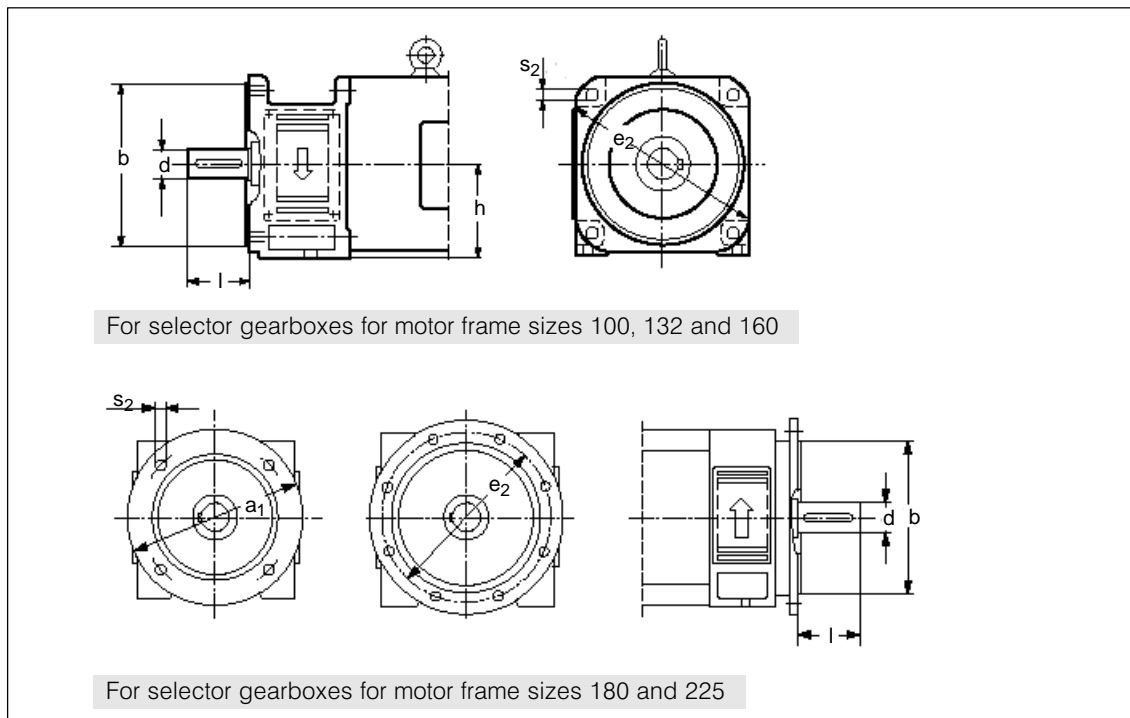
Flange dimensions for an induction motor (dimensions refer to Table 6-13)
